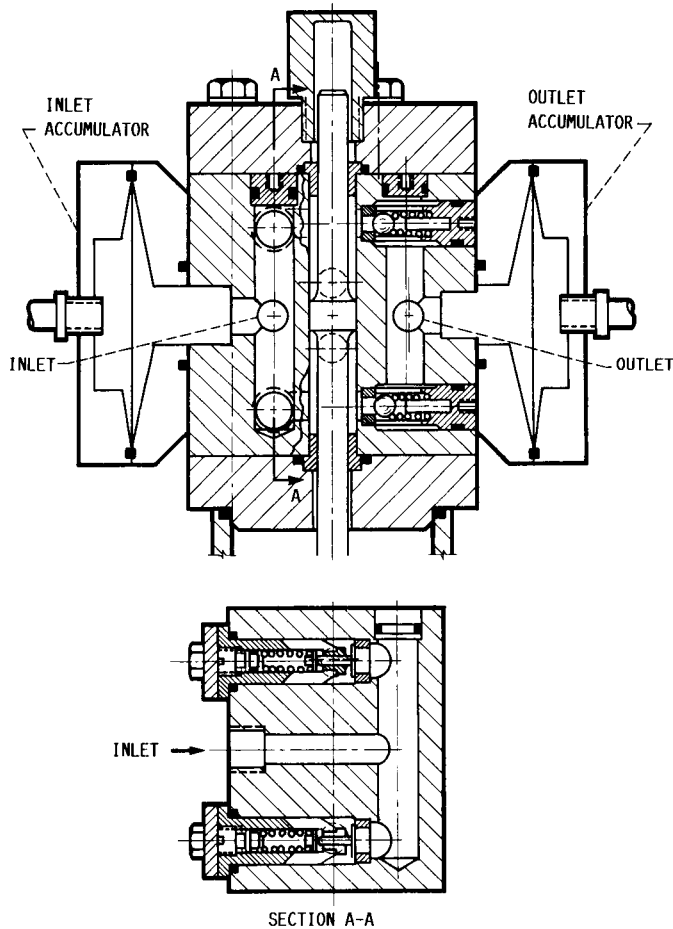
PUMP HOUSING CROSS SECTION SHOWING THE INLET AND OUTLET PASSAGES.
